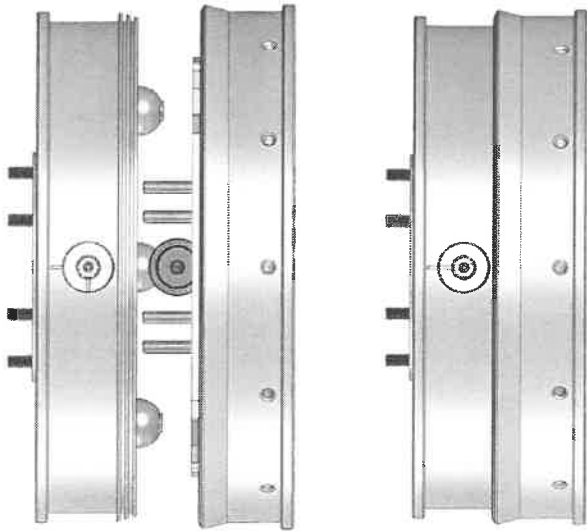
Views of the Spindle Mount and Universal Interface, shown unlatched and disengaged (left) and engaged and latched (right), are in the typical orientation for a horizontal spindle, which is not shown but would attach to the left-most face.
